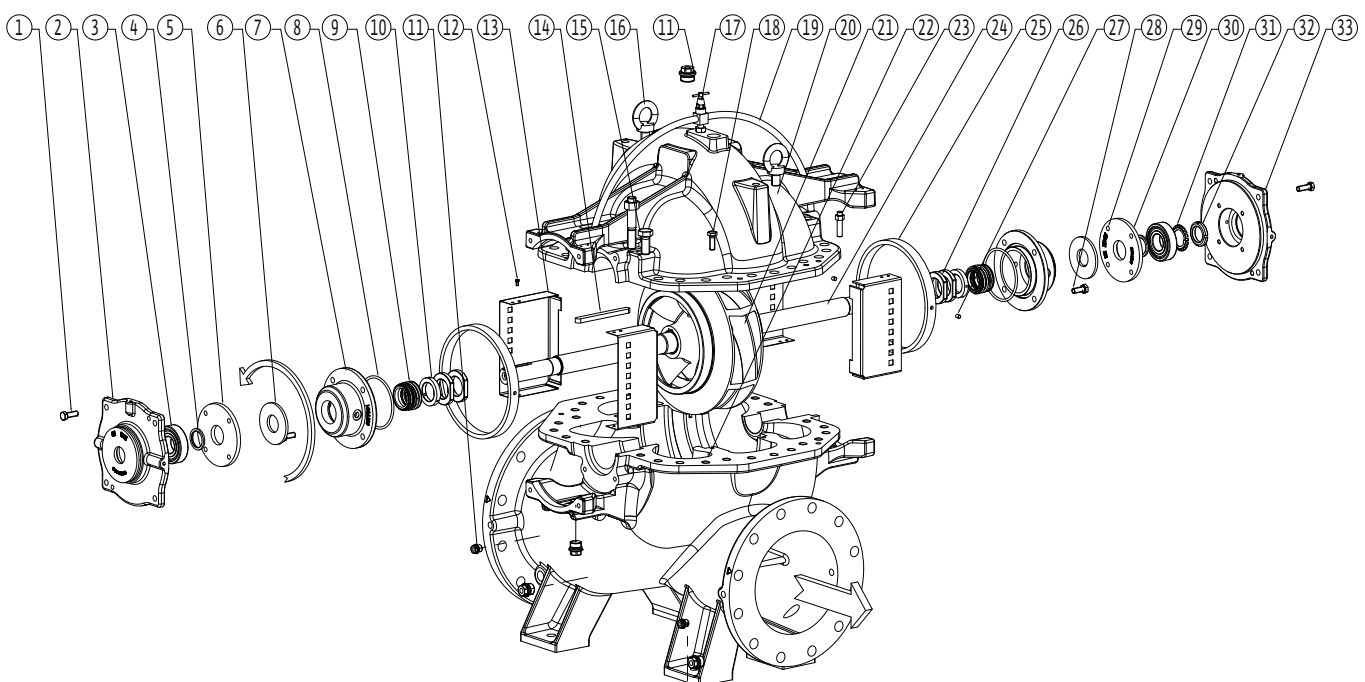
Exploded view of Atmos TERA-SCH hydraulic (mechanical seal version without sleeves)
